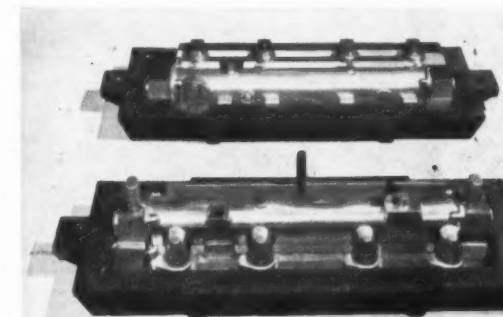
Pattern for job designed to eliminate cores, aid molding.
